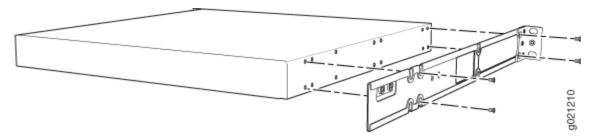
Attaching the Front-Mounting Bracket to the Side Mounting-Rail
